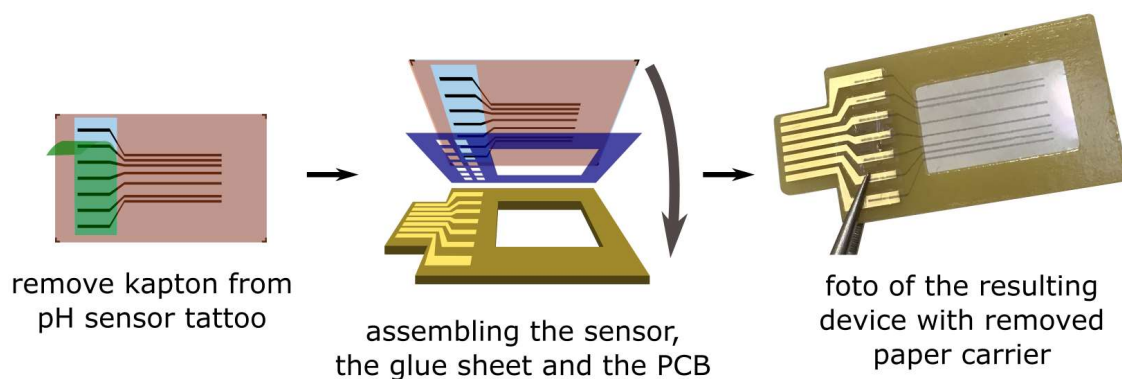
Assembling of the tattoo the glue sheet and the PCB.
